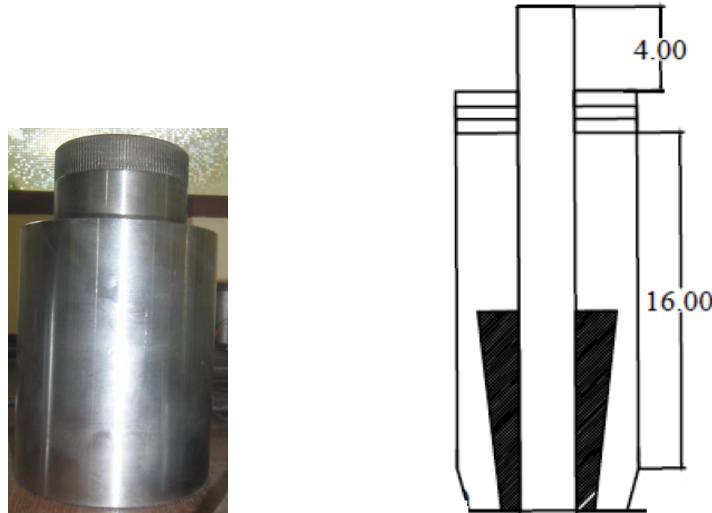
(a) Outer cylinder (b) Cross sectional view of Cylinder with wedge grip (All dimensions are in cm)
